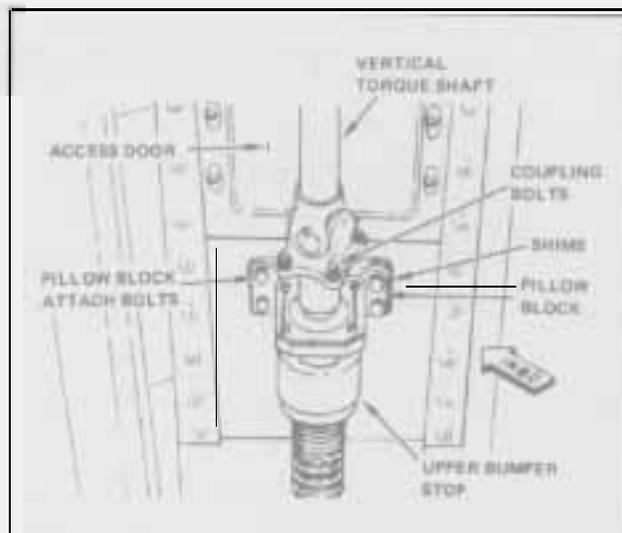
Remove the access door to reach the vertical torque shaft and the upper bumper stop.
